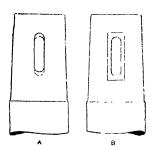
PREPARATION FOR FITTING COTTER IN CROSS-HEAD ATTACHMENT
